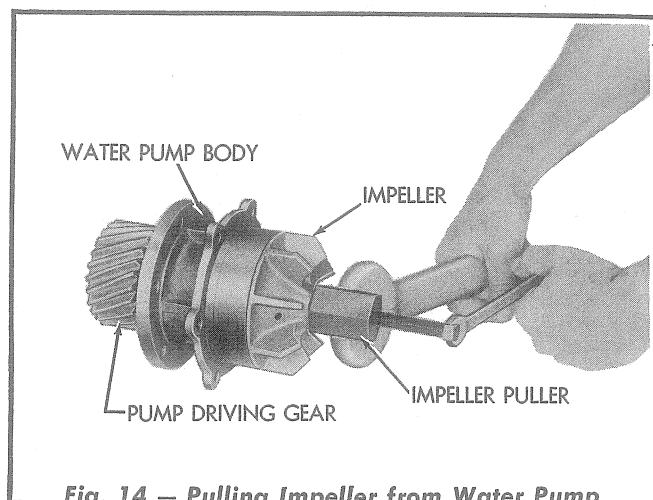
Pulling Impeller from Water Pump Shaft — First Type
